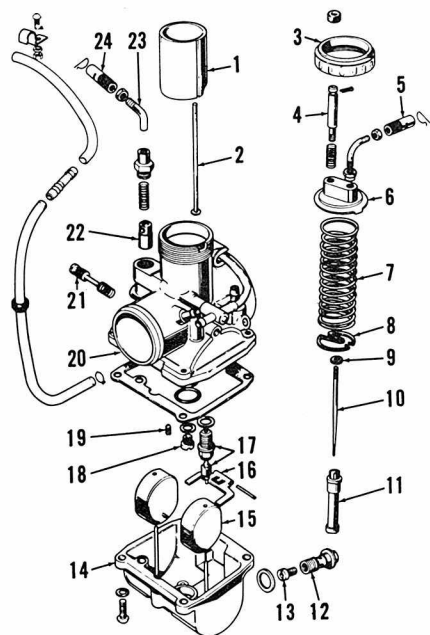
Exploded view of typical carburetor used on F5 and F8 models.
